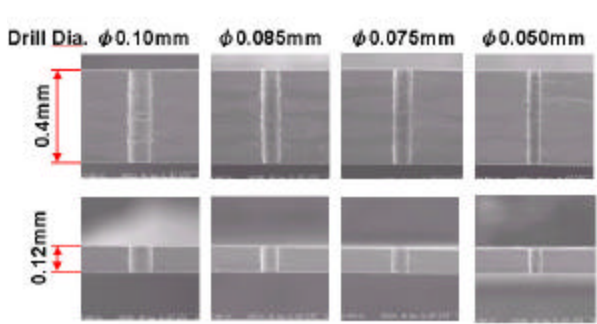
Micro Hole Drilling by 250kmin⁻¹ Spindle
